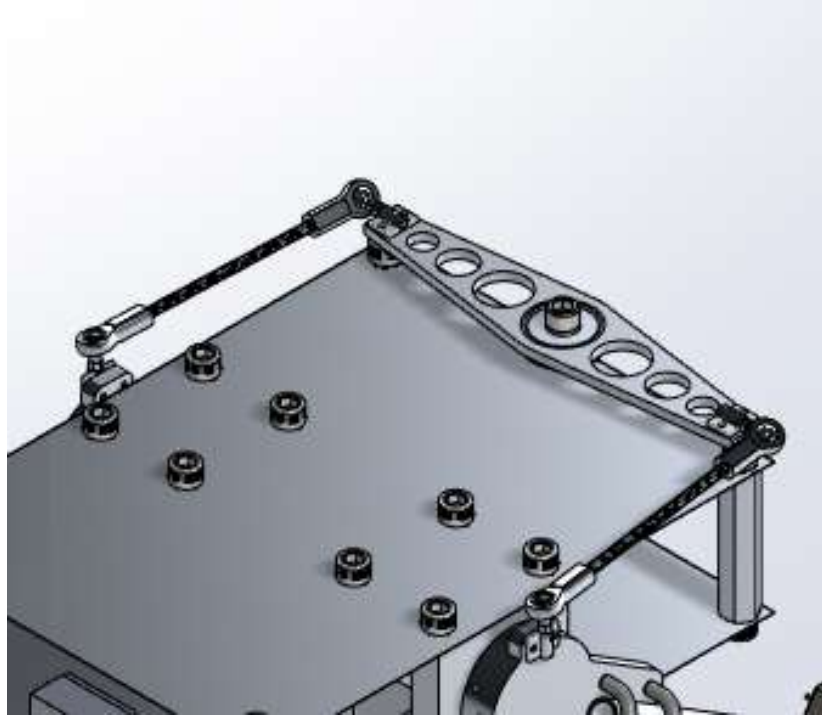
A view of the pivoting system that acts as the suspension system for the left and right micro rover Wheel-Leg CAD assemblies.
